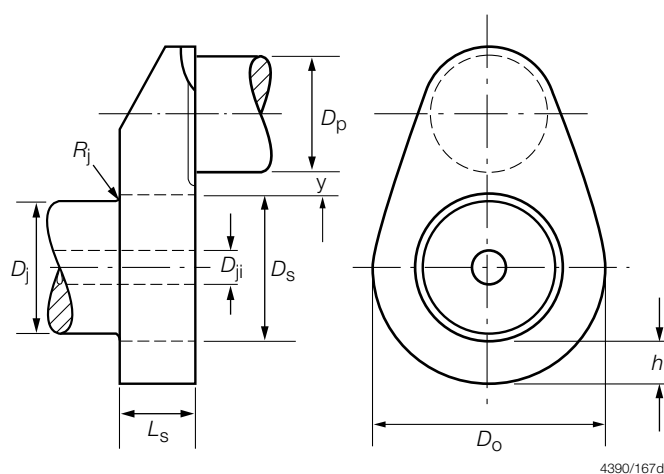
Crank dimensions for crankshaft without overlap
